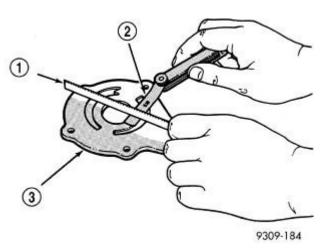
CHECKING OIL PUMP COVER FLATNESS - TYPICAL Courtesy of CHRYSLER LLC
